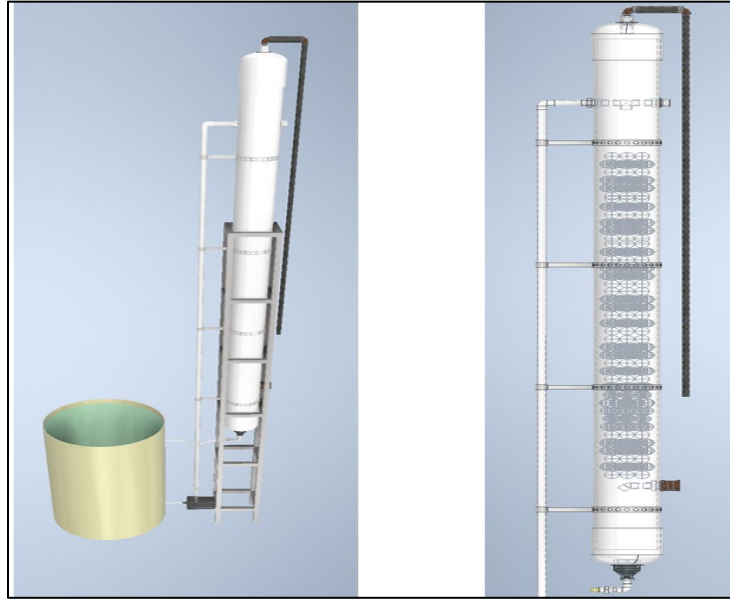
Drawing. Two CAD drawings of the water tower assembly
